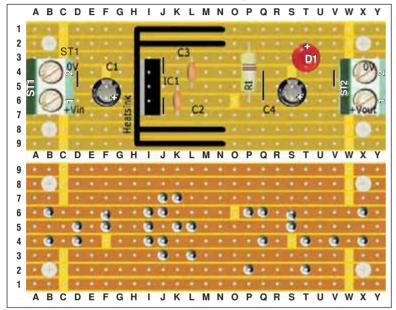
Stripboard layout of the 1A fixed-voltage regulator module: top component side view, (below) copper track view.
